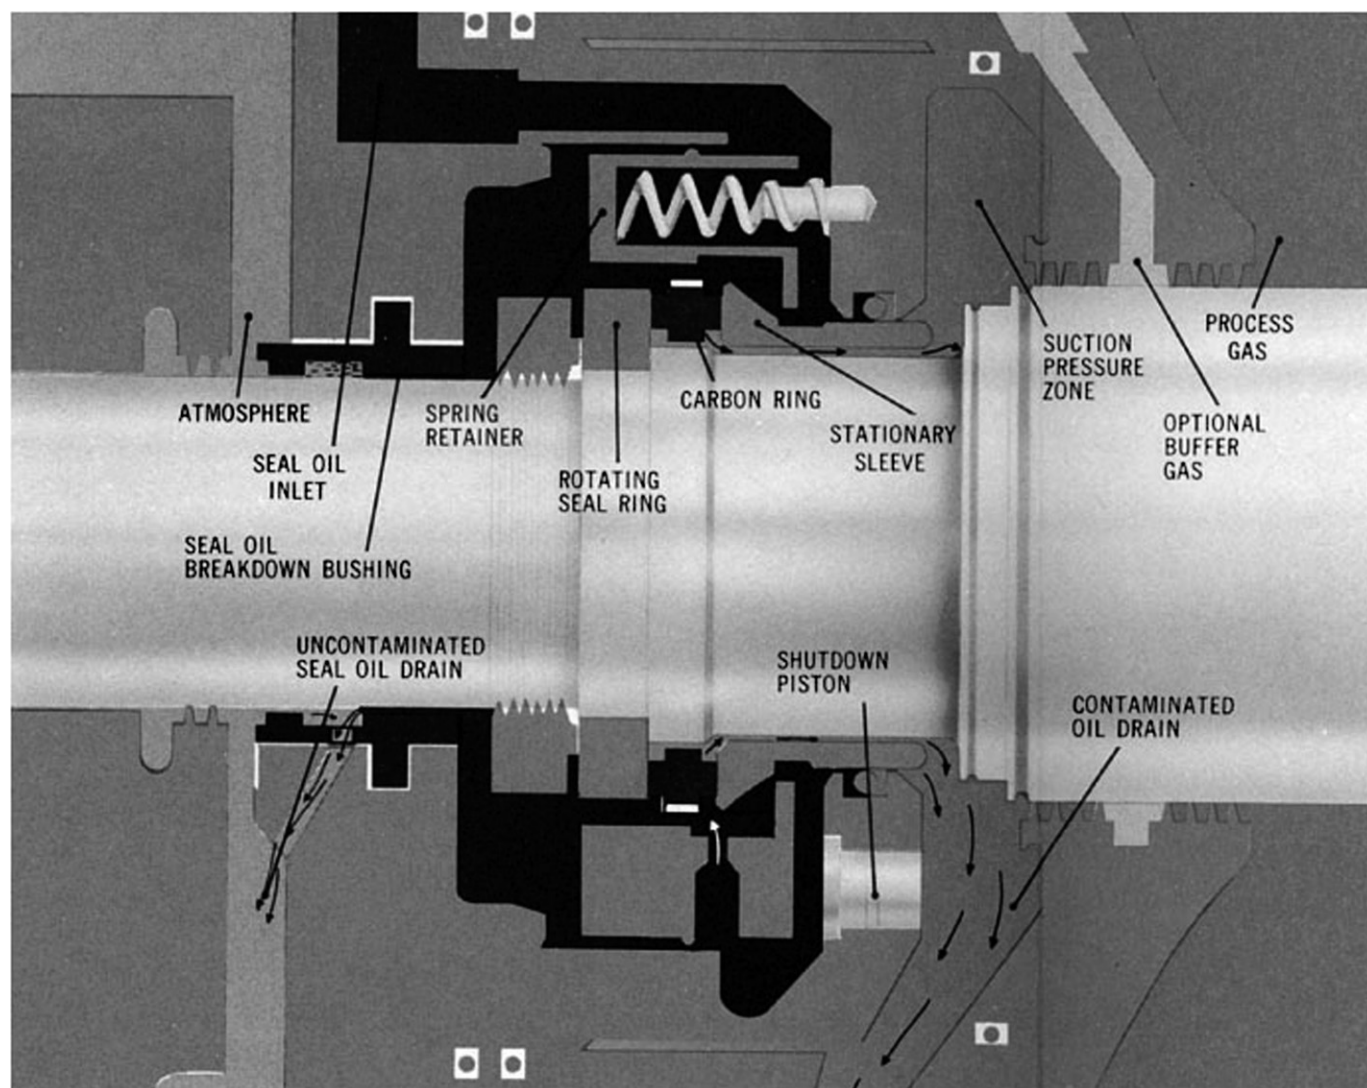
• Compressor contact seal (Courtesy of Elliott Co.)
